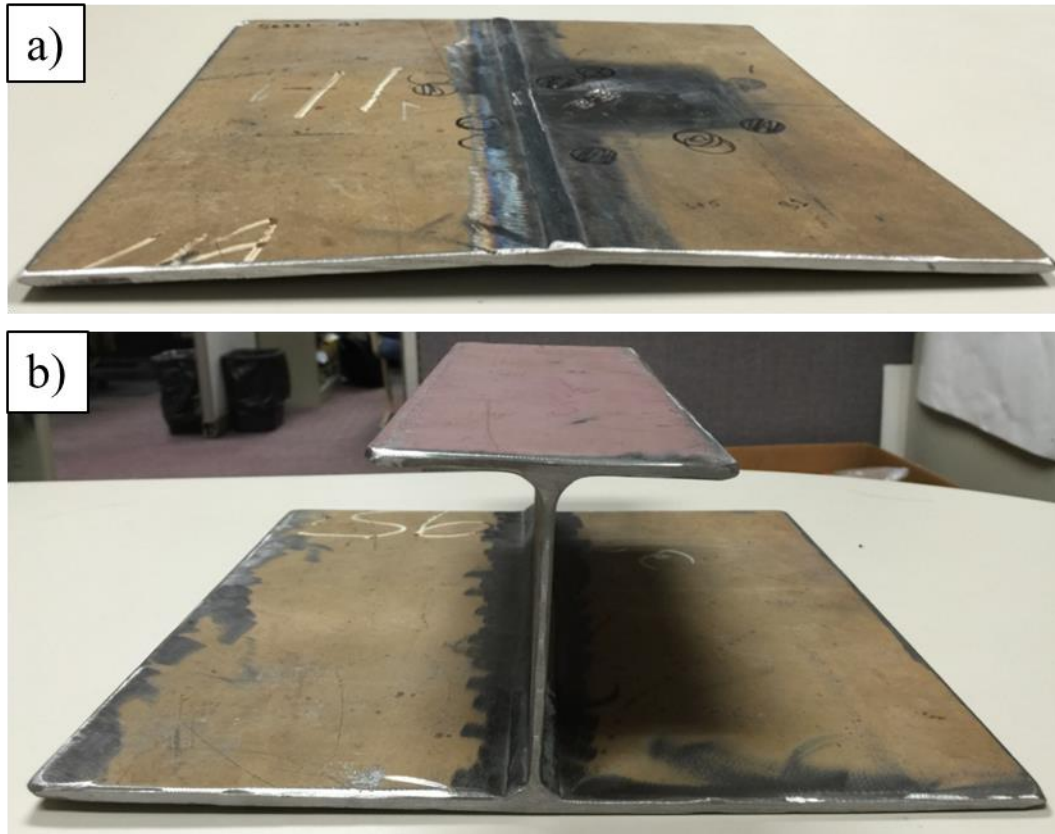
DH36 a) butt and b) tee joint weldments investigated for plate, weld, and HAZ microstructures.
